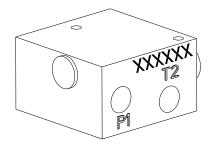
Control Valve - Part Number Location Identified at XXXXXX
